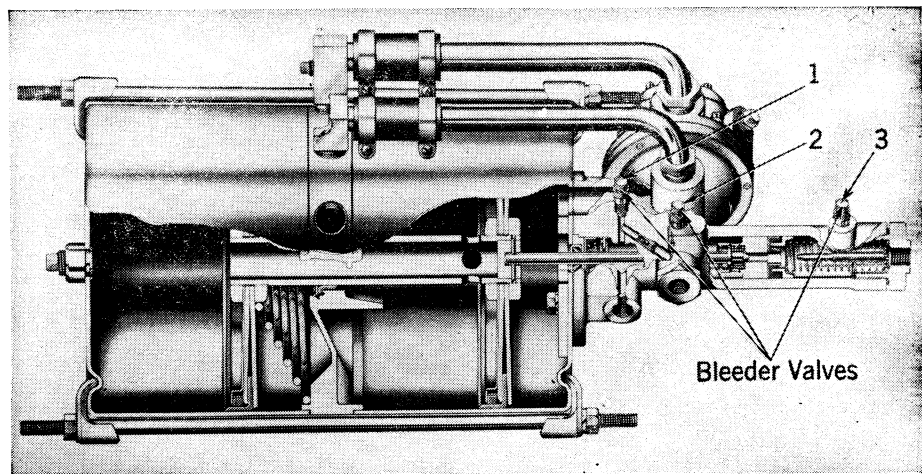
Section through Second Series Hydrovac with control valve integral with hydraulic slave cylinder, and double piston vacuum suspended power cylinder
